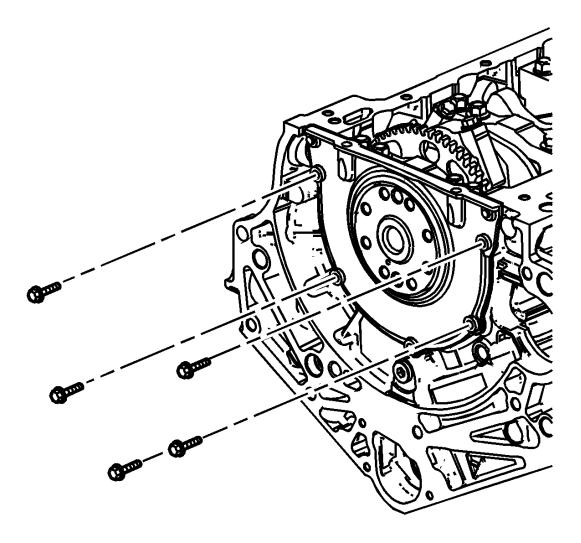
Locating Crankshaft Rear Oil Seal Housing Bolts Courtesy of GENERAL MOTORS COMPANY
